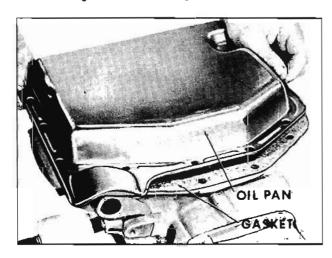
Installing Oil Pan and Gasket Installing Governor
